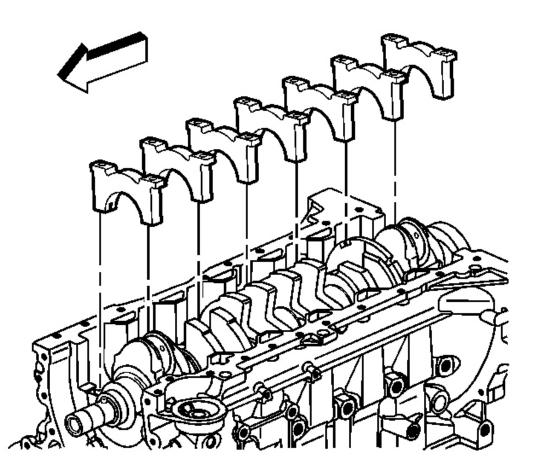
View Of Crankshaft Bearing Caps Courtesy of GENERAL MOTORS CORP.
